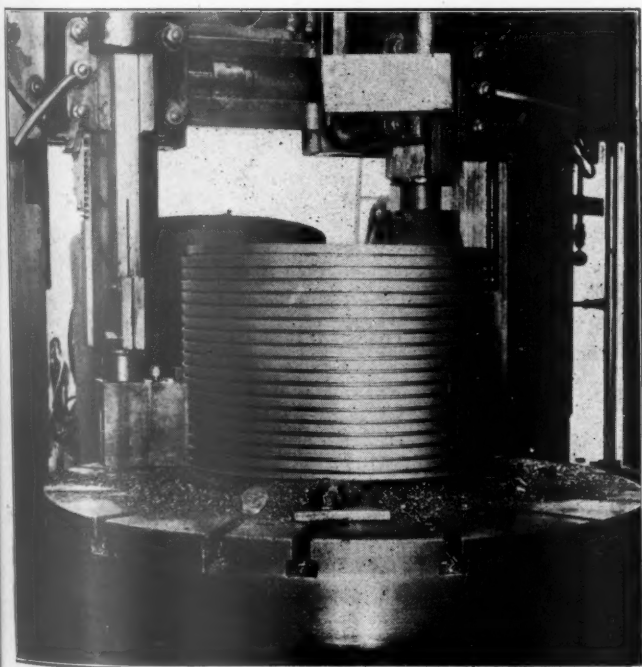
Boring Inside Surface of Packing Tub Automatically Severs the Finished Packing Rings
